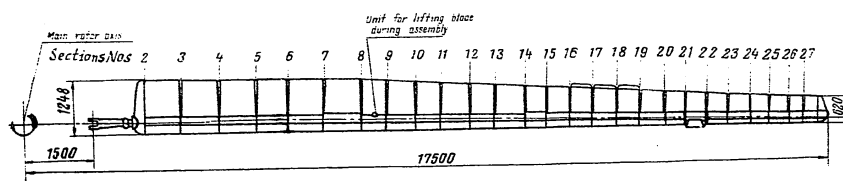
GENERAL TOP VIEW OF MAIN ROTOR BLADE.
